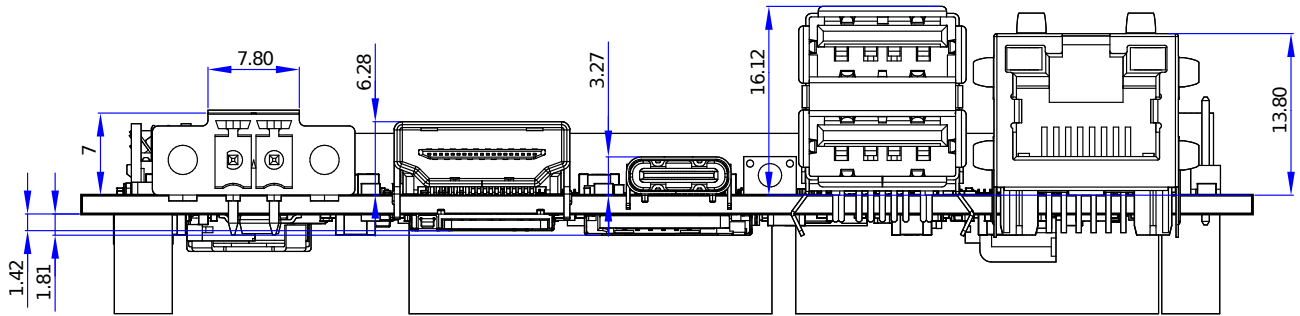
Mallow Carrier Board dimensions (in millimeters) - back side (back view)
